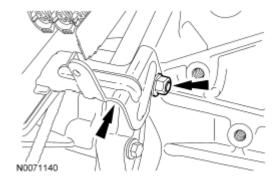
Locating CMS Wire Connector Bracket Aside And Nut
